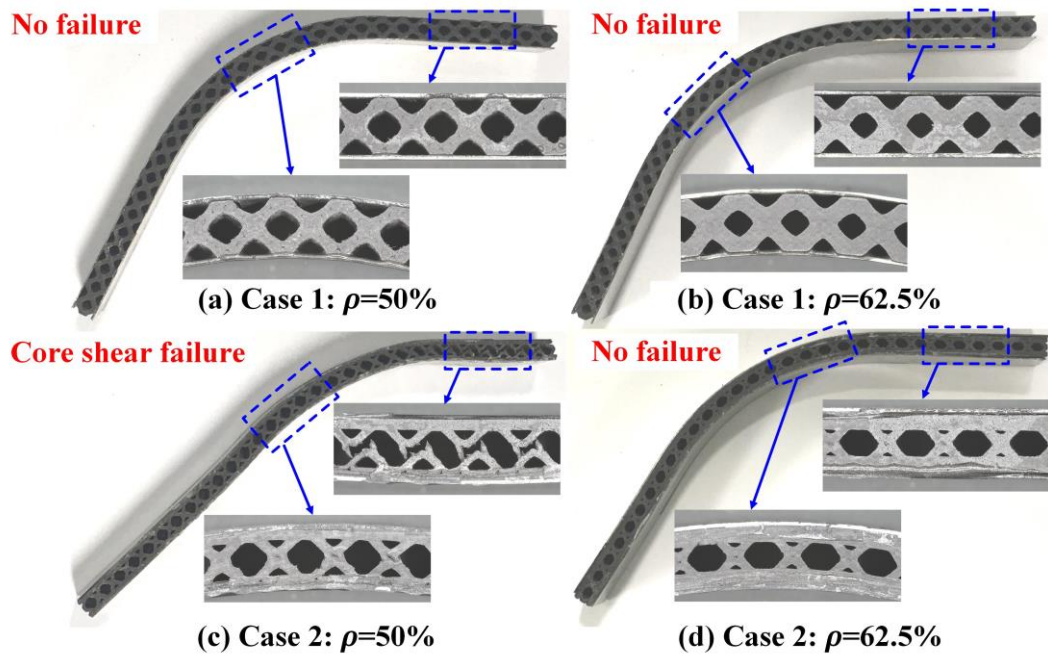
Deformed sandwich sheets and highlighted failure modes after L-bending.
